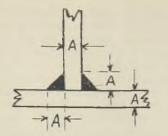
FILLET WELDS FOR T JOINT.
